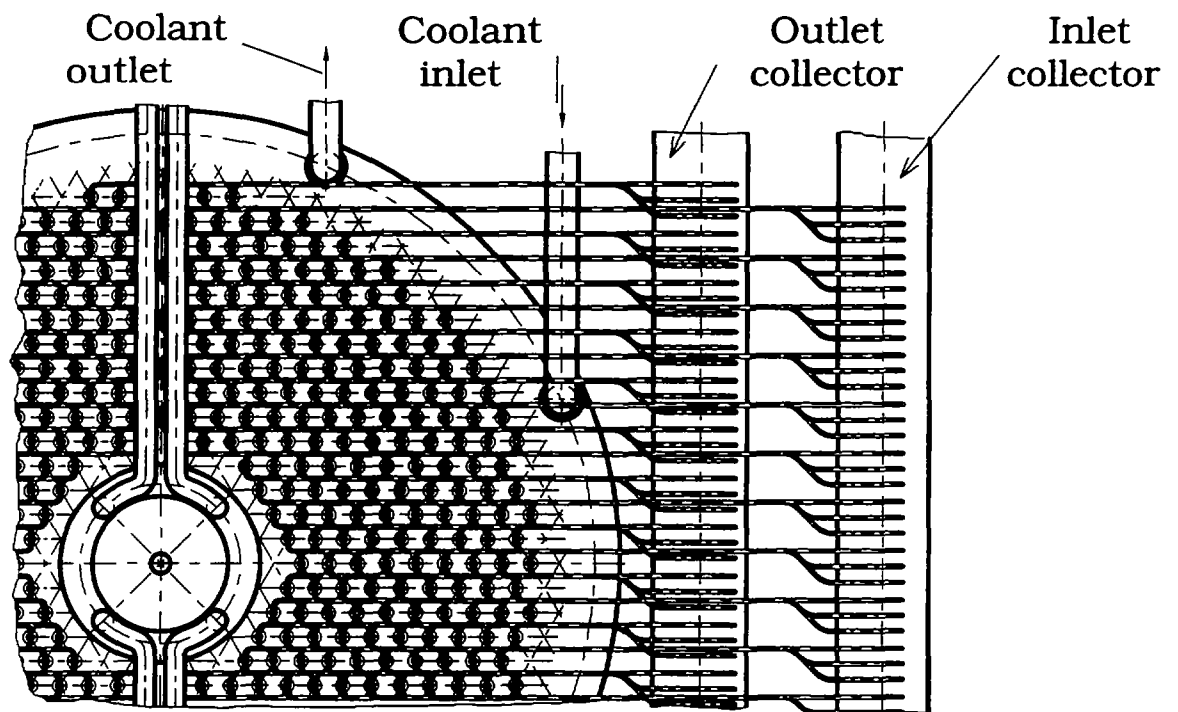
Thermal spectrum blanket - a part of the vessel containing fuel assemblies
